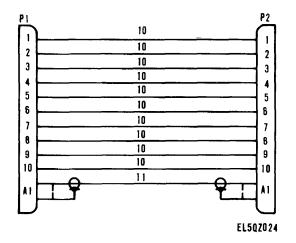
Cable Assembly, Special Purpose, Electrical 217-803029-000 (4 W6), Wiring Diagram.
